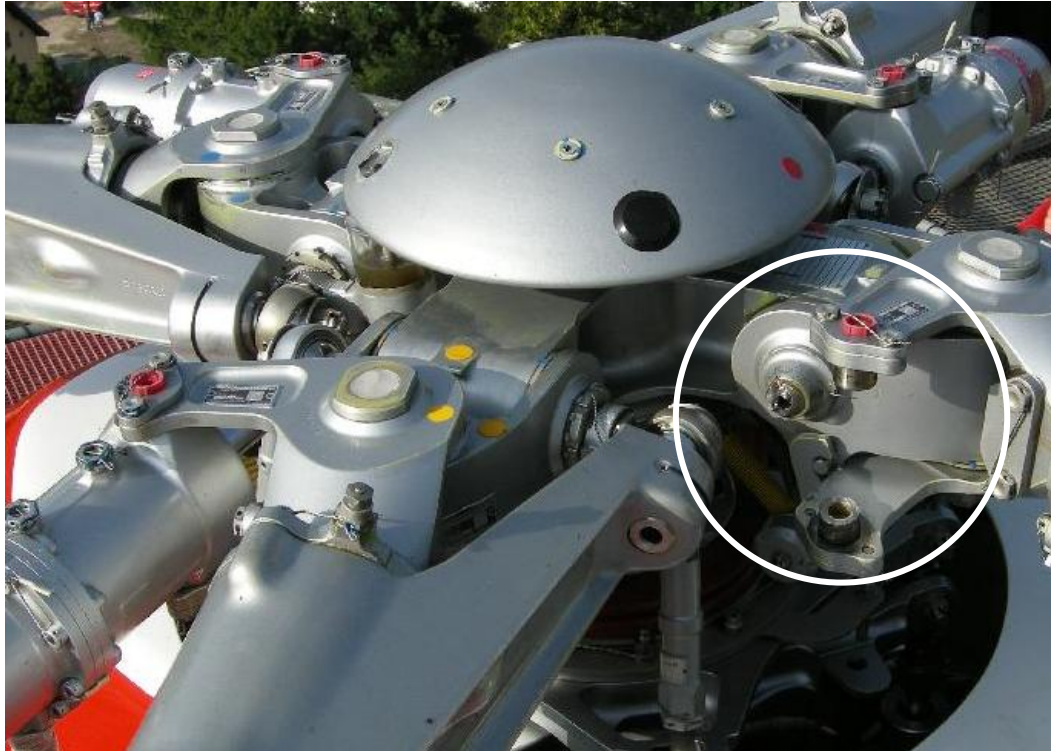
"Red" drag damper missing, fracture area on the rotor head
